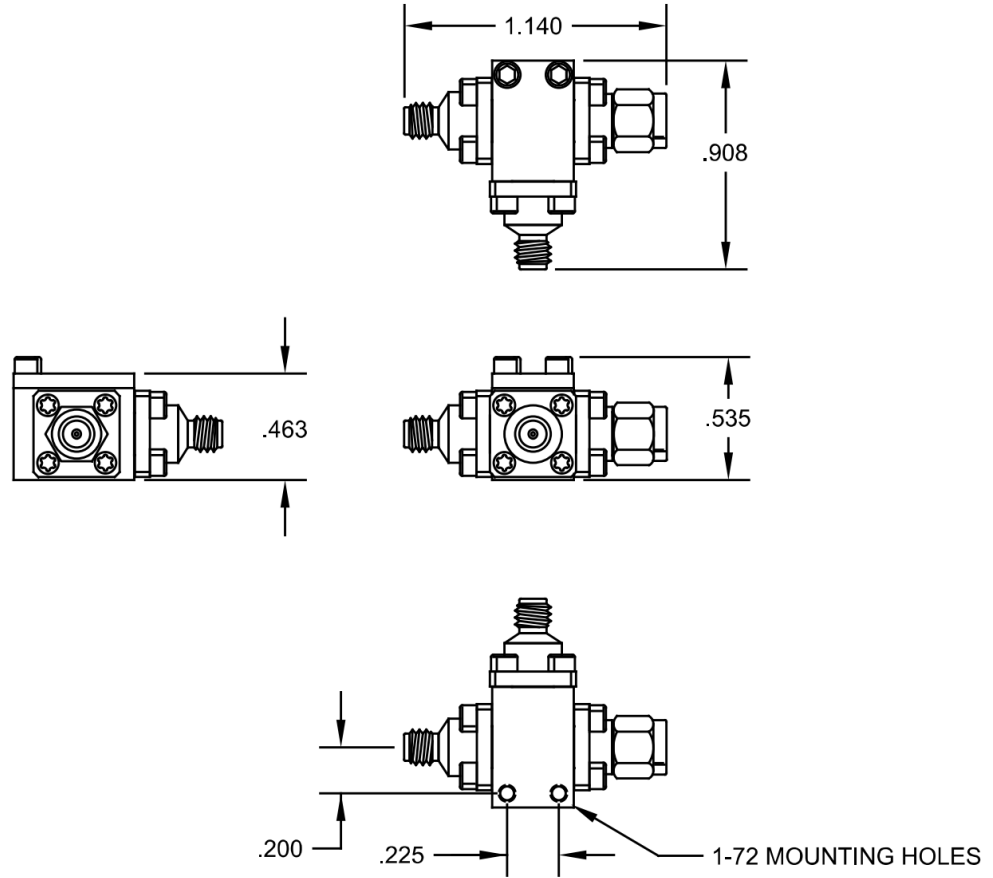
HL9469 mechanical drawing (opt. -JPJ)
